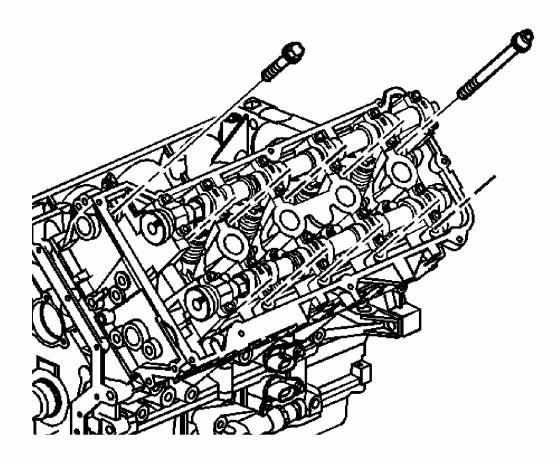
Locating Cylinder Head External Drive Bolts Courtesy of GENERAL MOTORS CORP.
